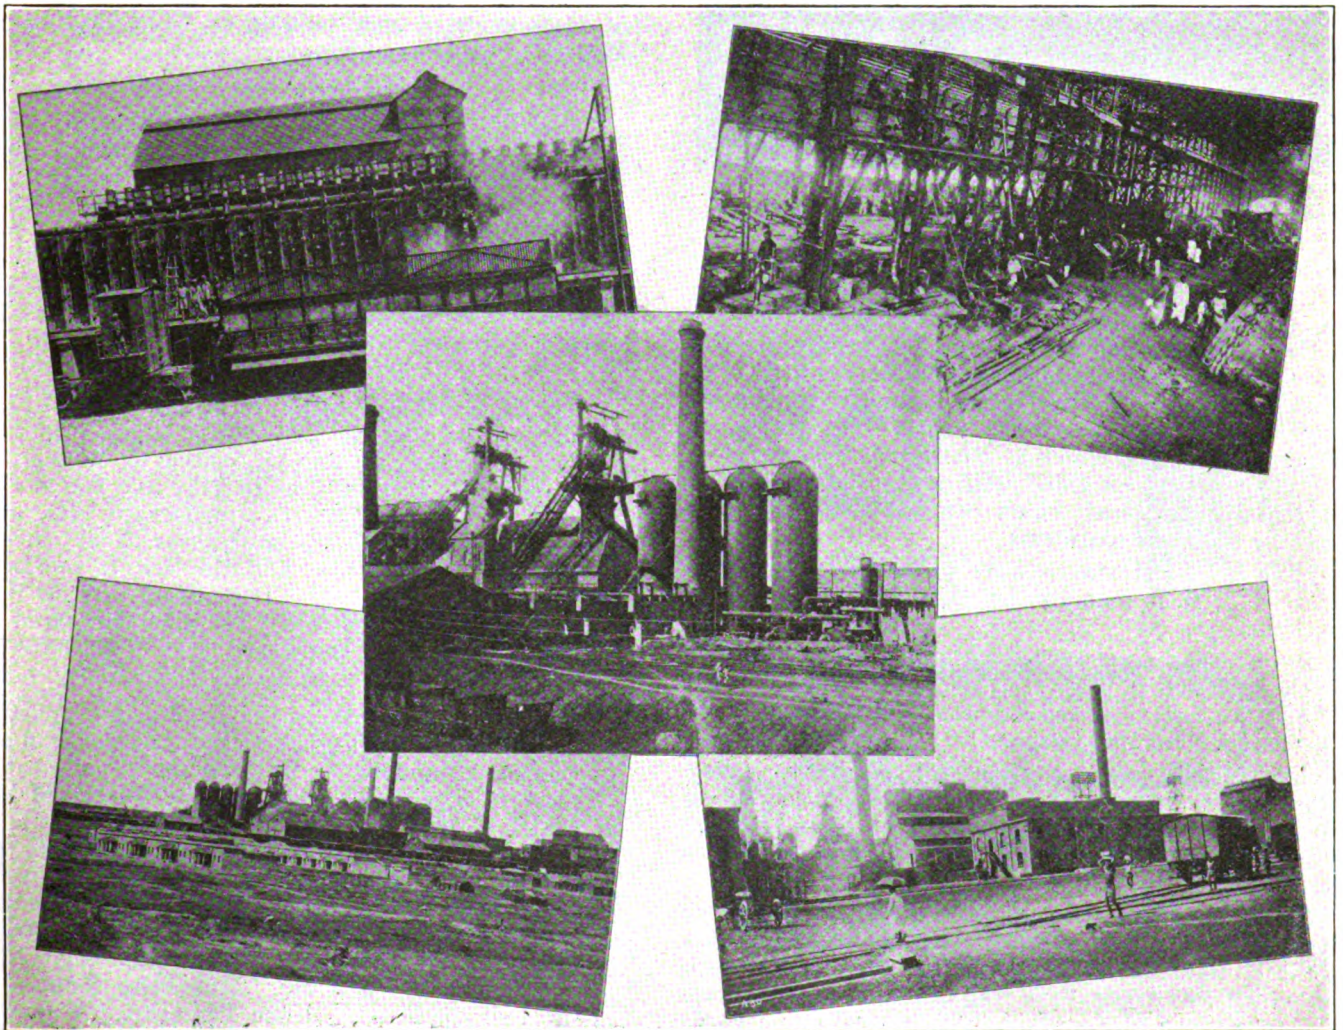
Upper left—Coke ovens and quenching car. Upper right—Interior of machine shop. Center—Close-up of furnaces and stoves. Lower left—View showing general character of surrounding terrain. Lower right—General view showing native workmen, type of freight car, etc.
